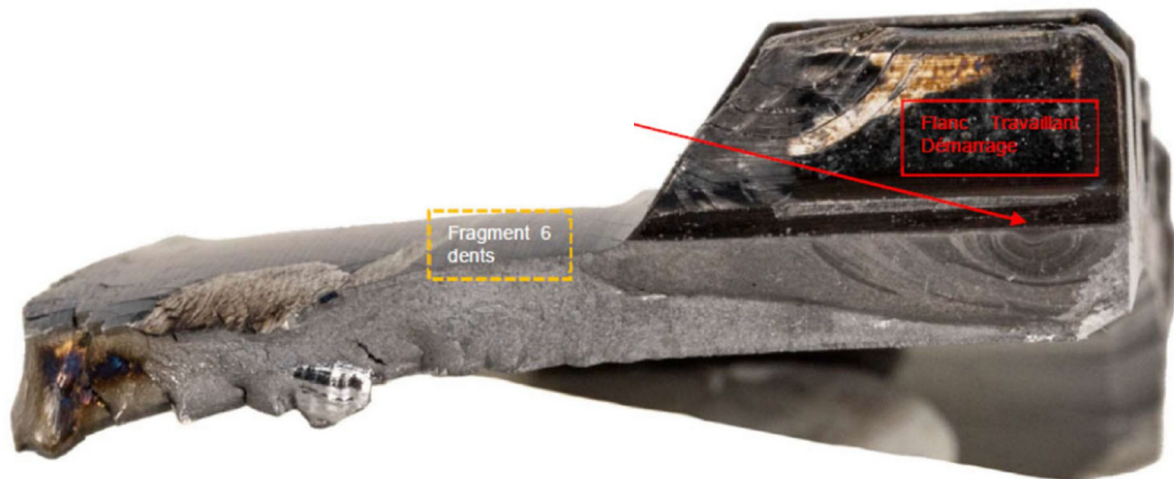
Detailed image of one of the fragments of the drive gear. The red arrow points to the starting point of the fatigue fracture. Source: Safran Helicopter Engines.
